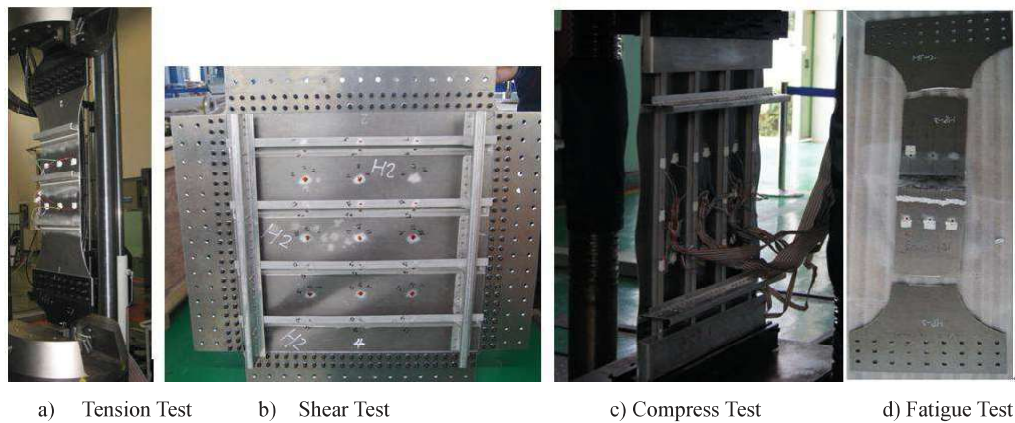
Strength Test of Friction Stir Welding of 2060Al-Li Alloy
